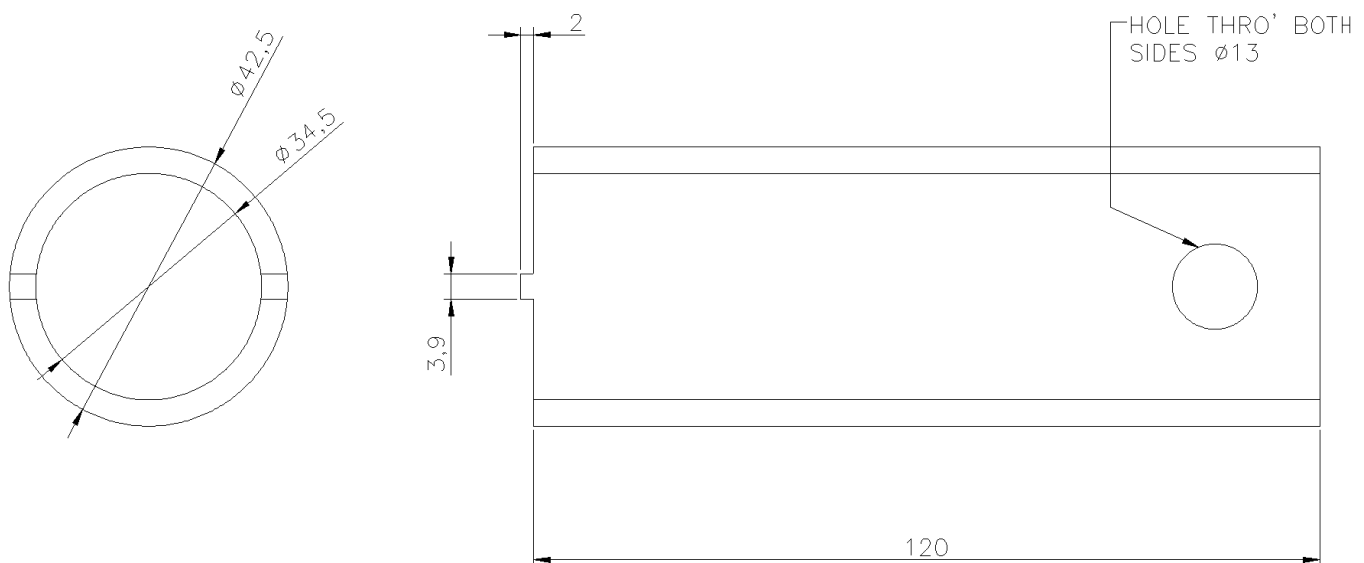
Tool for removing steam valve seat made from 1 1/2" Steam Pipe
